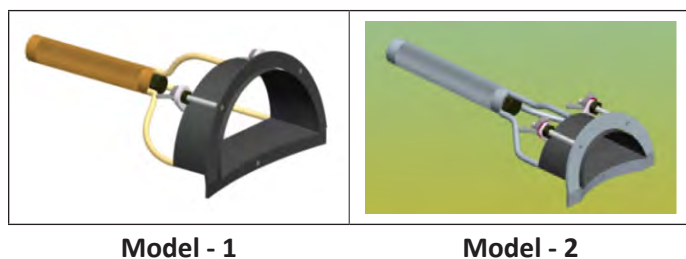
Gum tapping tool developed in Pro Engineer CAD software
